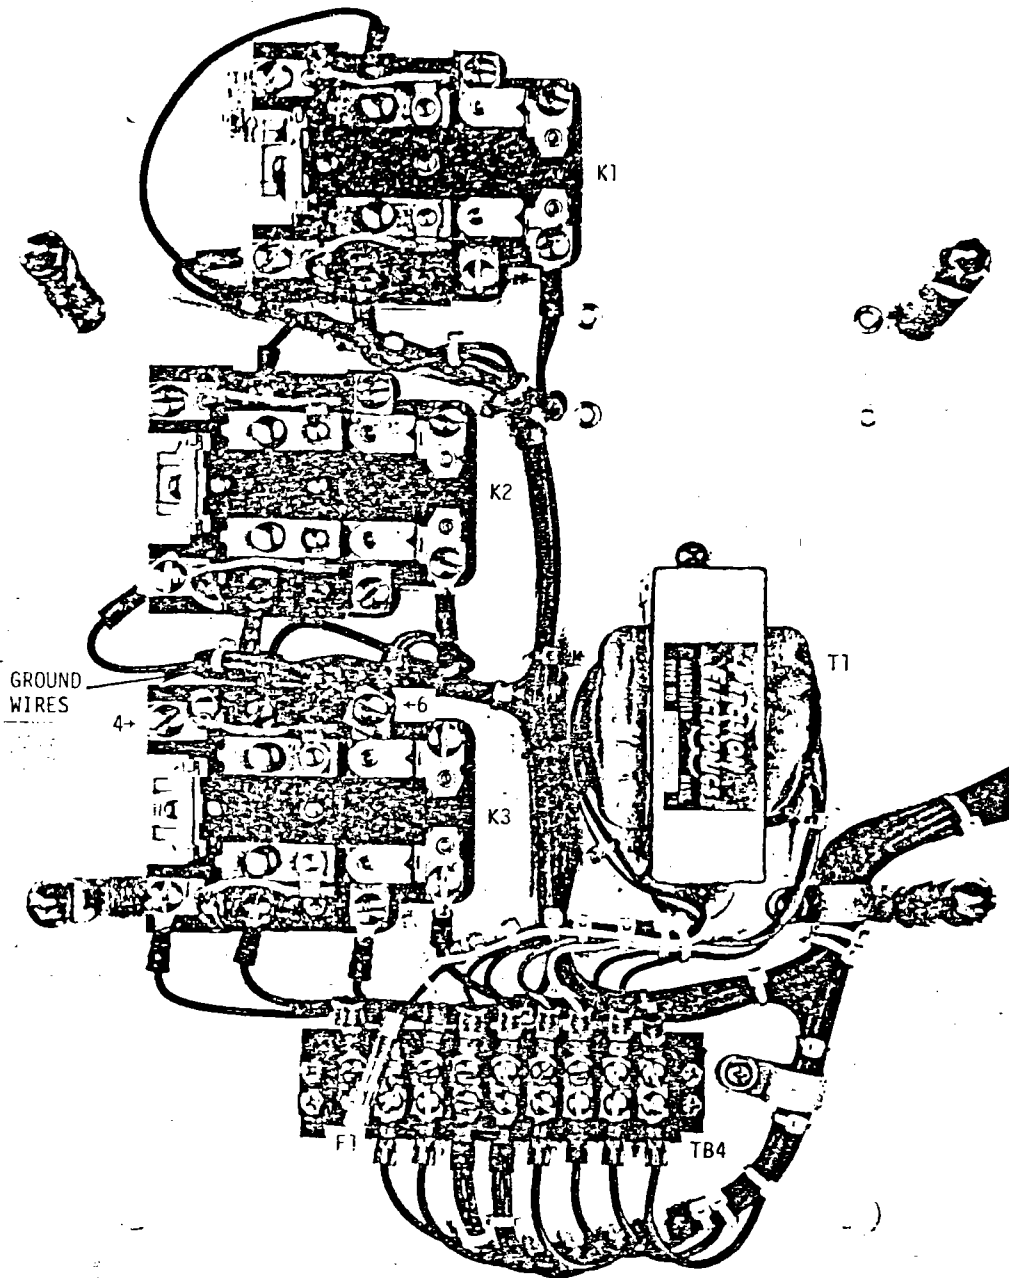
Rear View of SC-105 Front Panel Assembly
